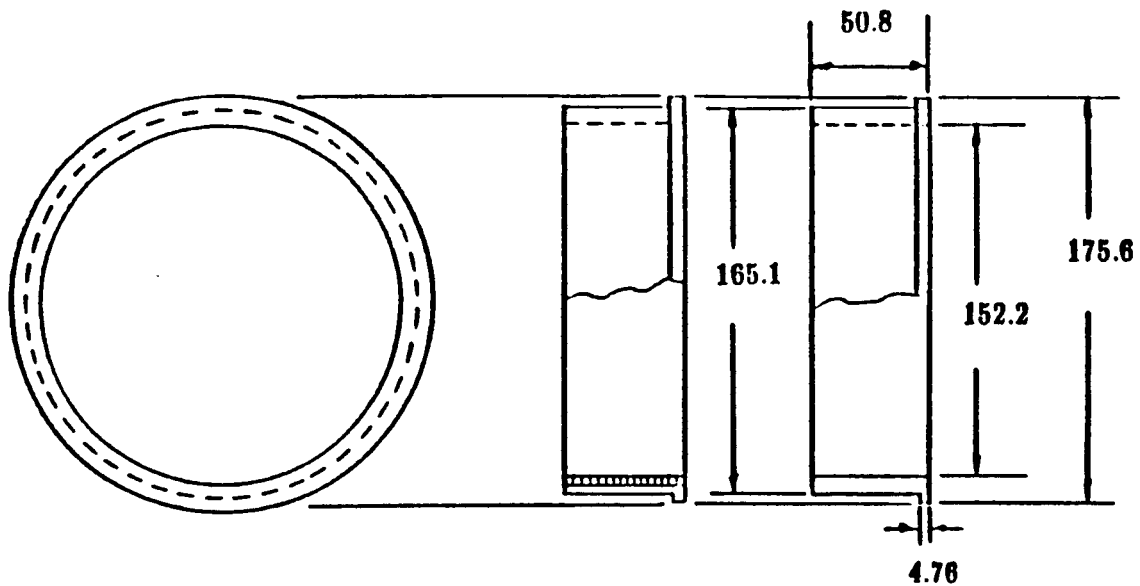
Honeycomb and smooth inserts for 0.4 mm (0.016 in) radial seal clearance. Drawing dimensions are millimeters.
